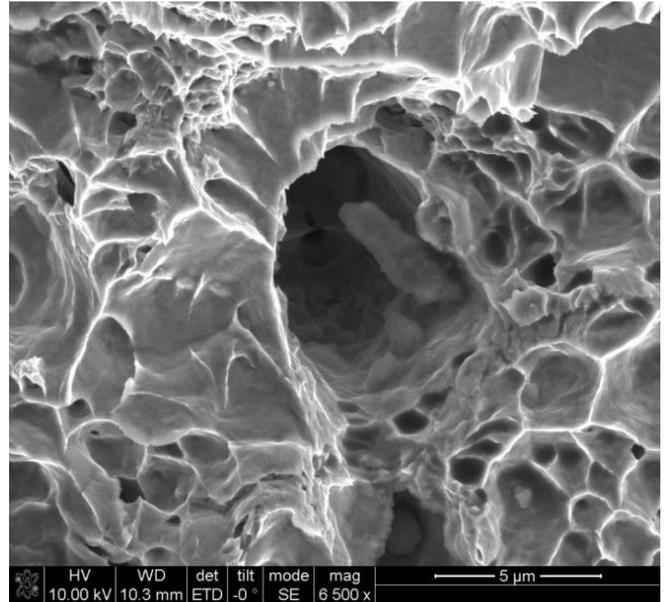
Fractograph of sample A showing a mixture of fibrous and cleavage surfaces.
